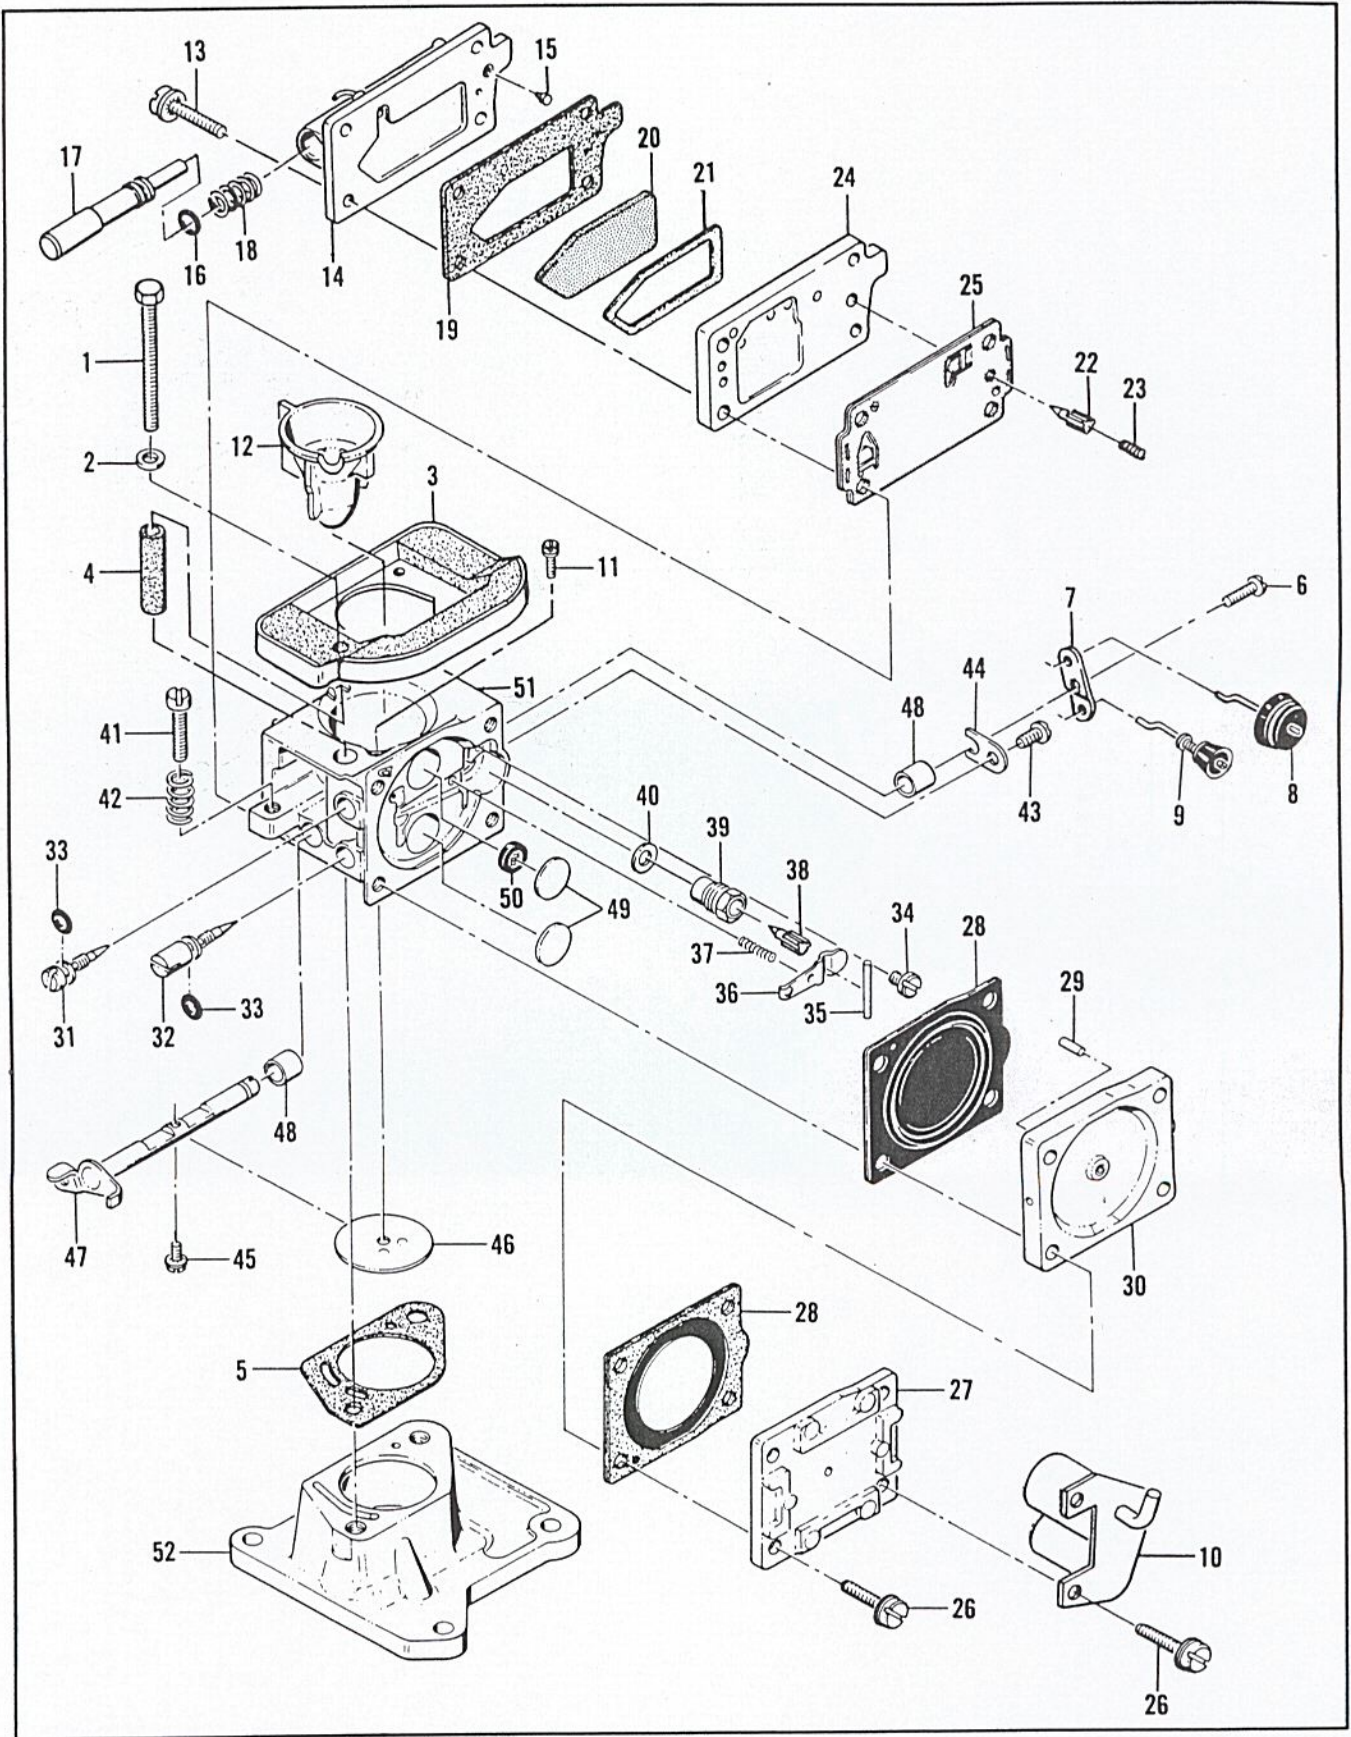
Carburetor, Adapter, and Dash Pot Assembly
